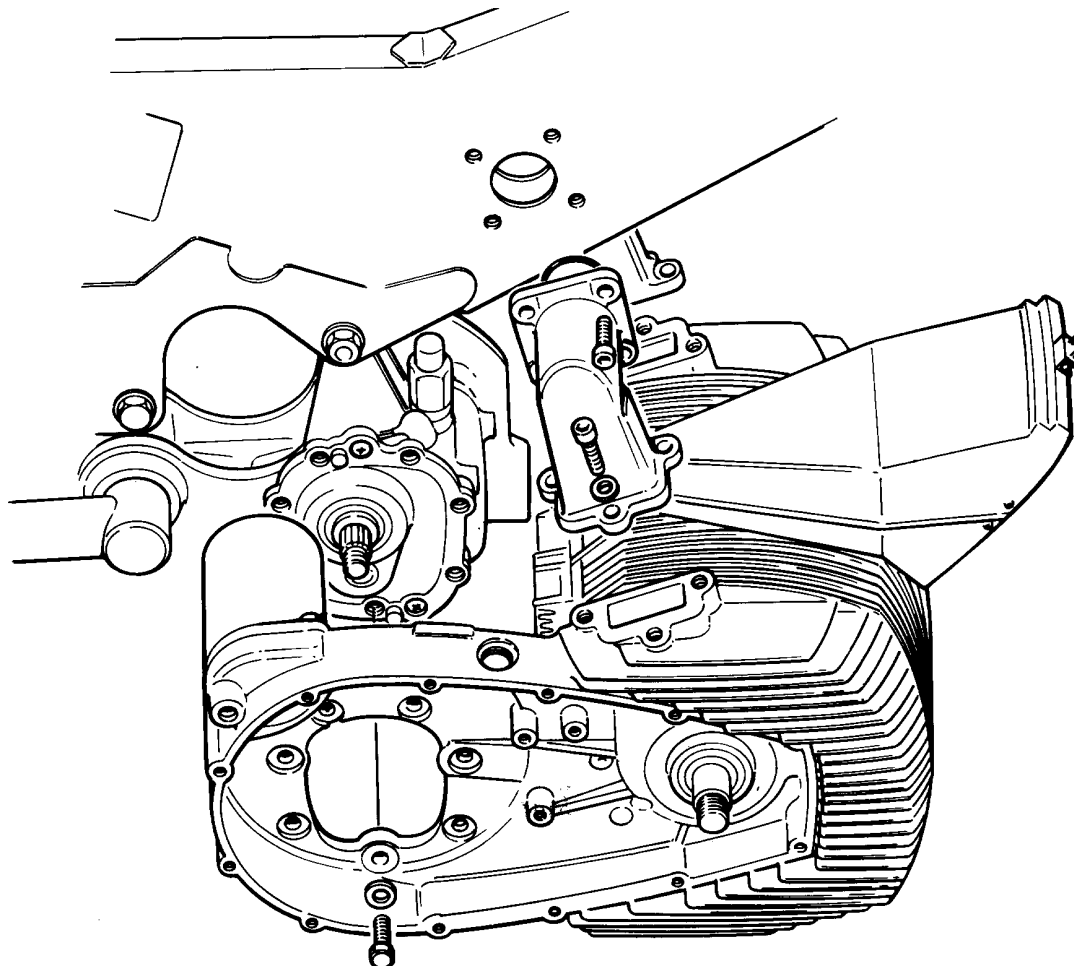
Removing clutch and engine sprockets using the extractor tool
